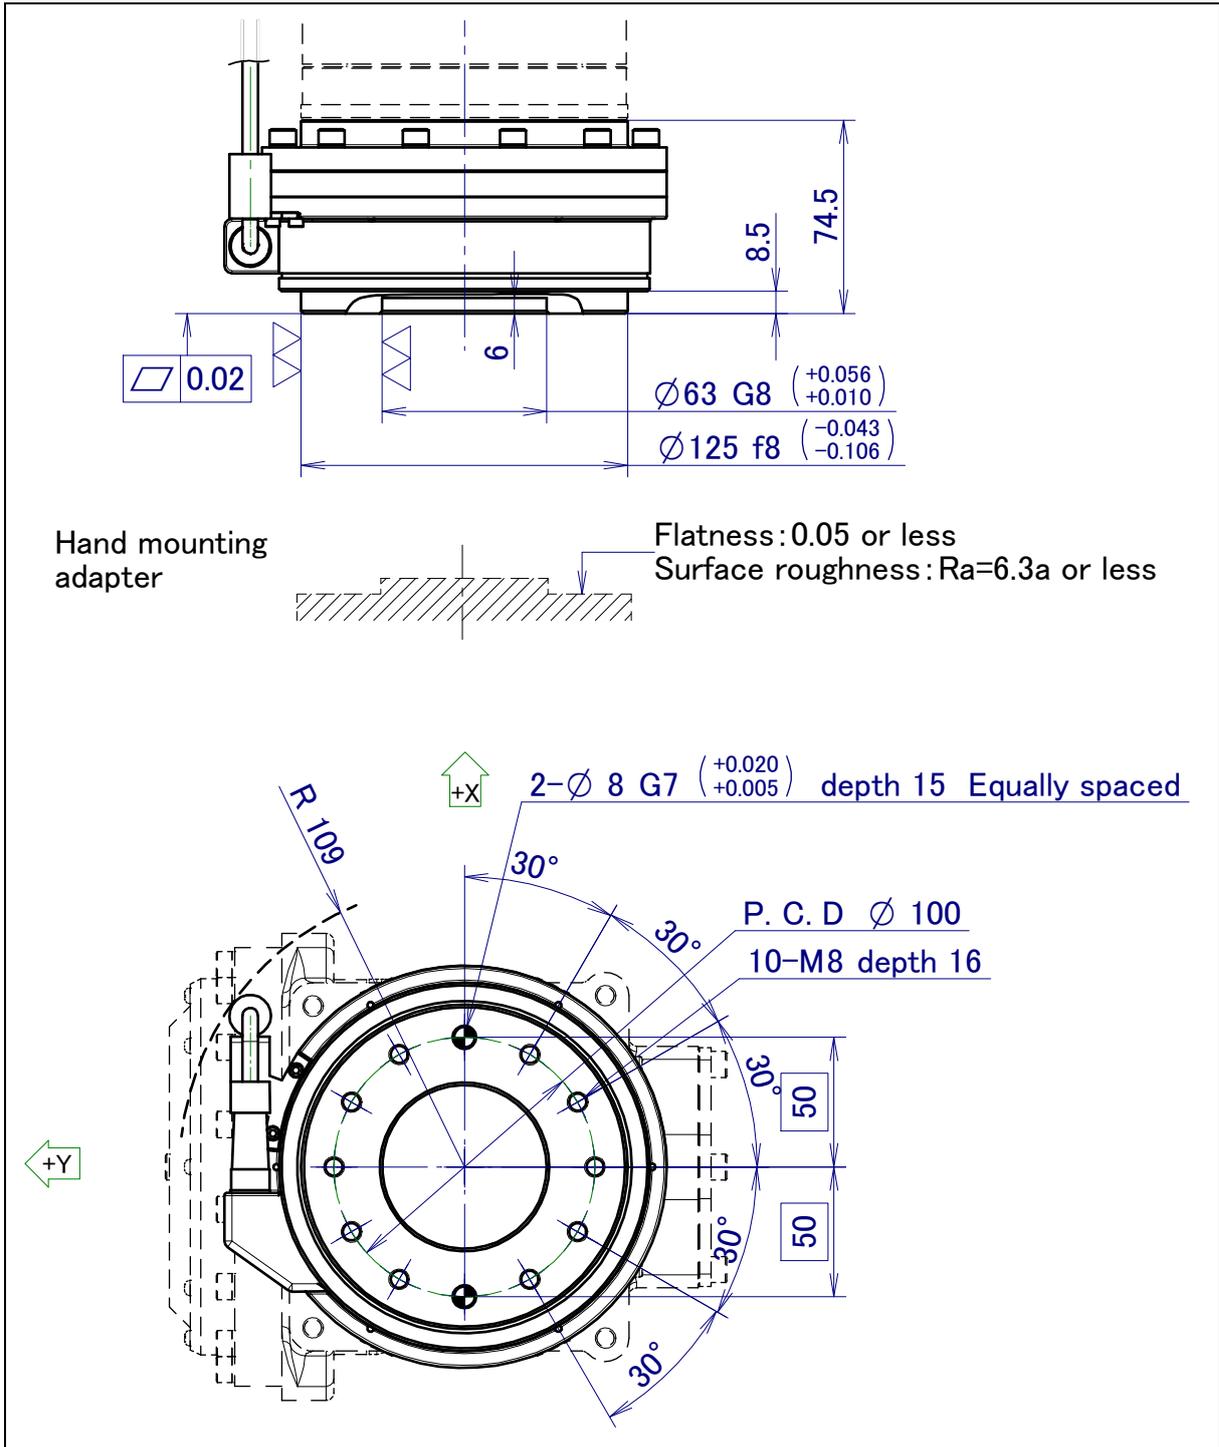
(c) Wrist section end effector mounting surface (FS-100iA)
